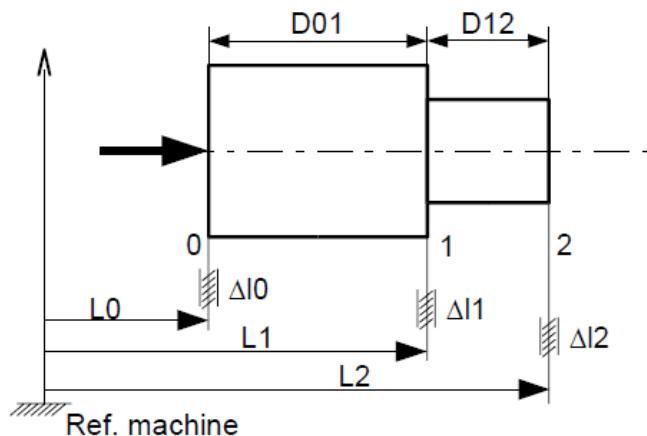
One dimensional modelling of a machining phase (Bourdet 73a)
